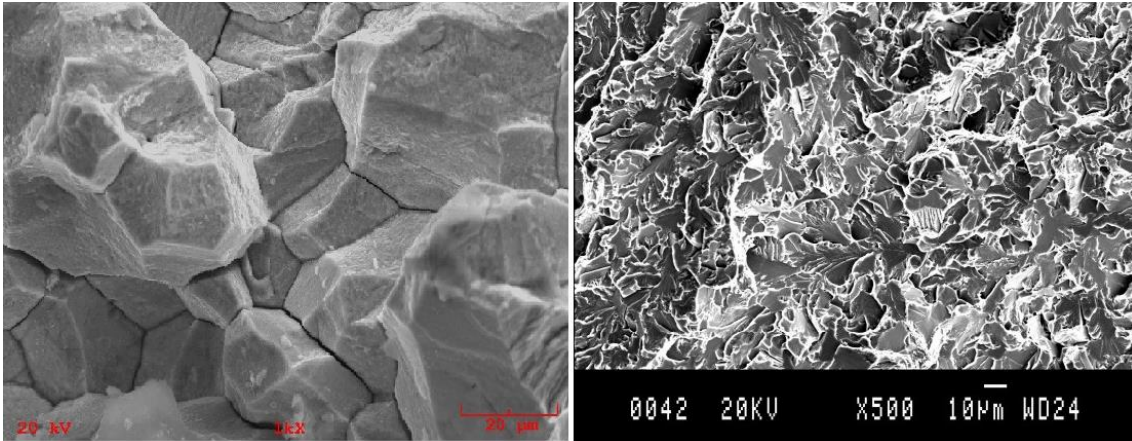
Left: Intergranular fracture showing a "rock candy" appearance.[46] Right: Quasi-cleavage fracture surface in carbon steel.[47]
